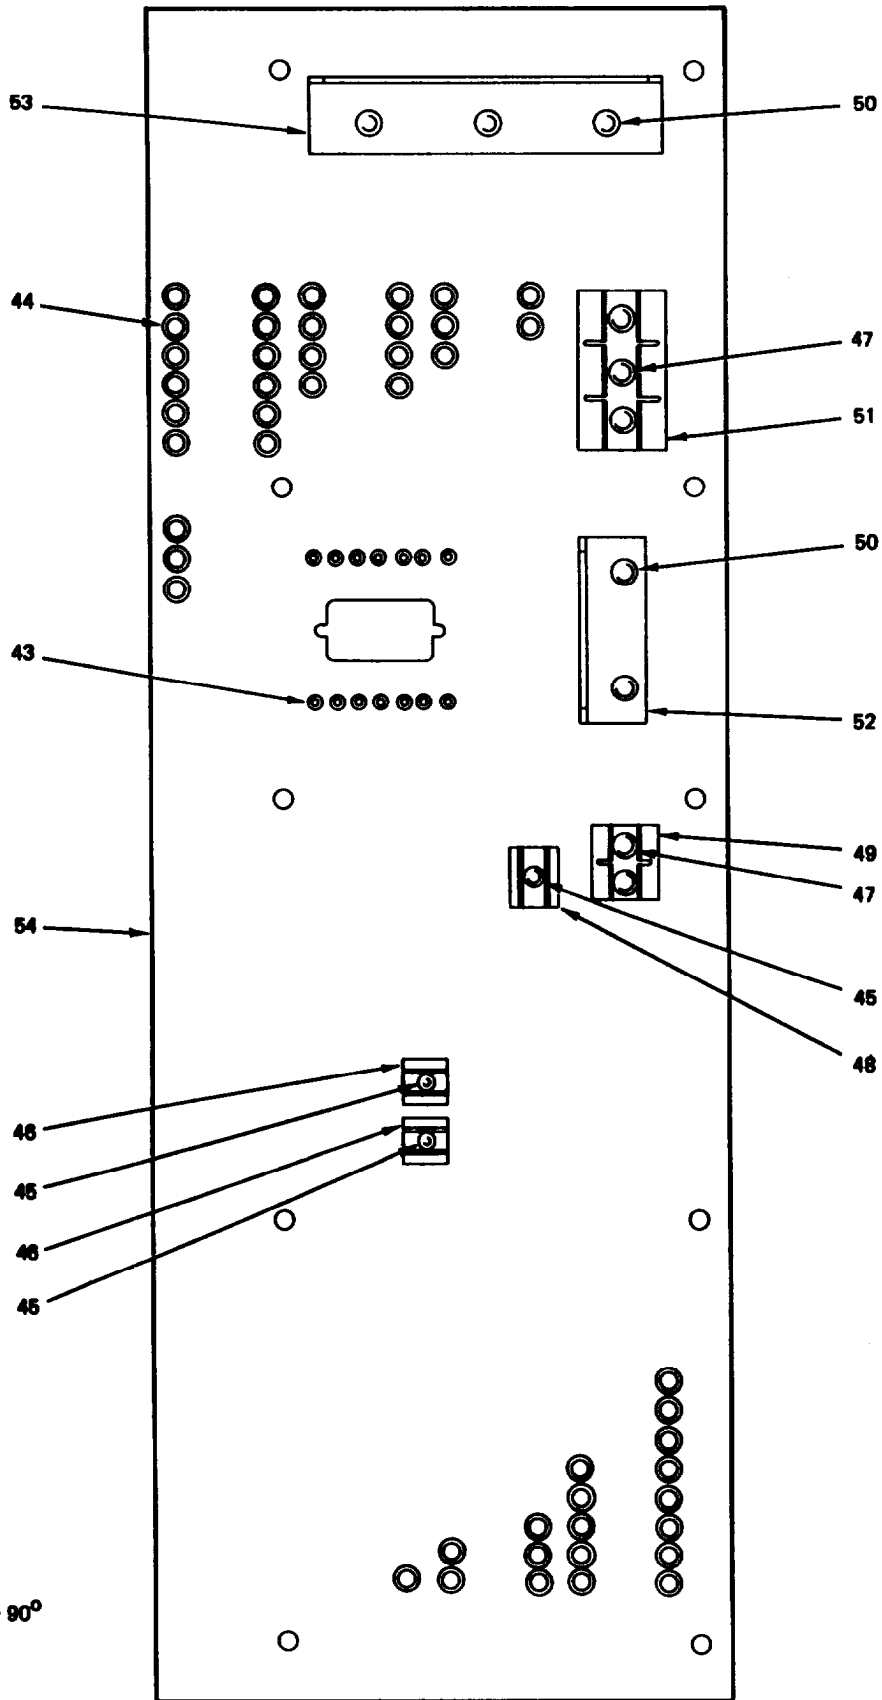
Electronic Component Assembly No. 1 (Sheet 1 of 2)
